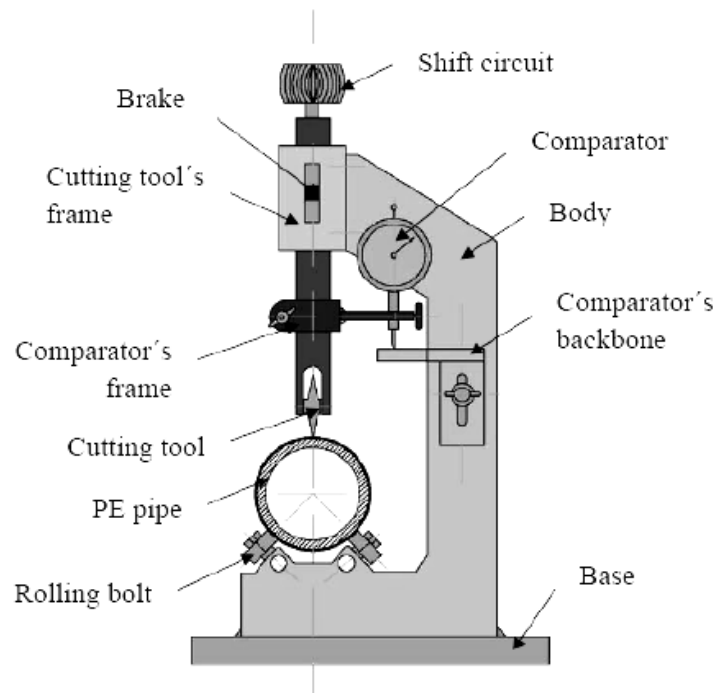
Scheme of device for cutting of an initial axial notch [8,9]
